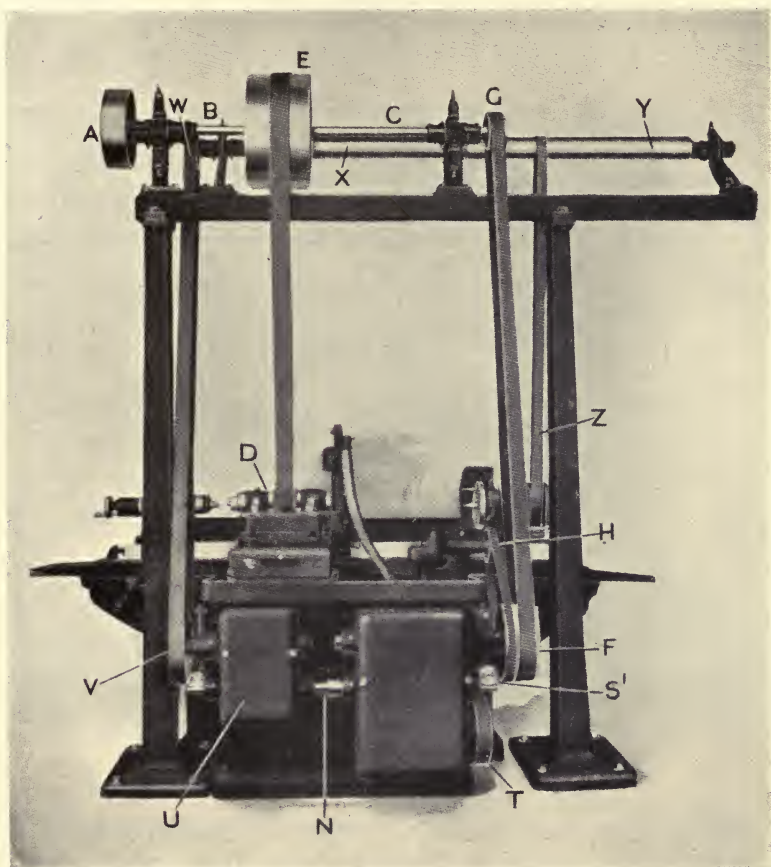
ARRANGEMENT OF DRIVE—CINCINNATI GRINDER CO.
